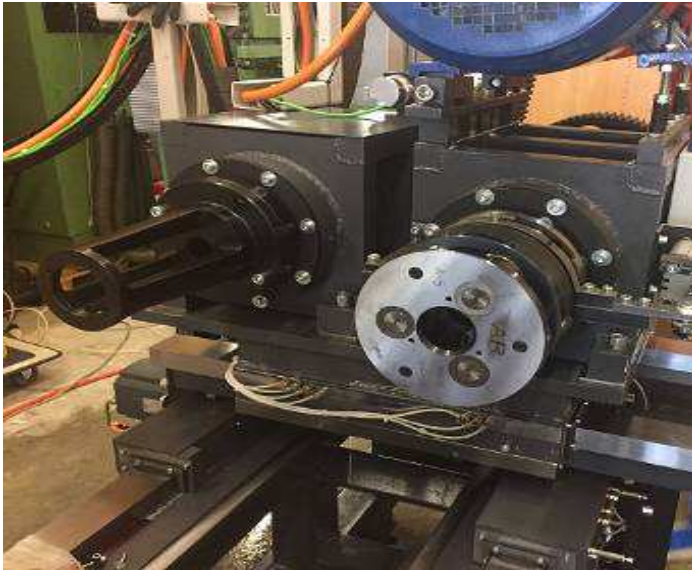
Installation of adjustment that the headstock can be adjusted at the hundredths. He is easy on both sides reference surfaces for spindle bore, that the belts tighten
